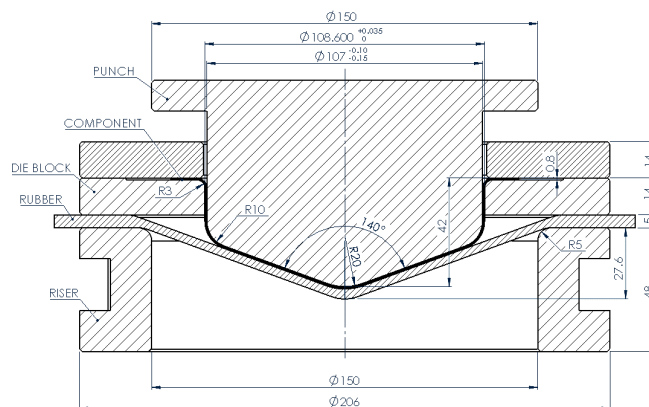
Tool Assembly for Rubber Assisted Deep Drawing
